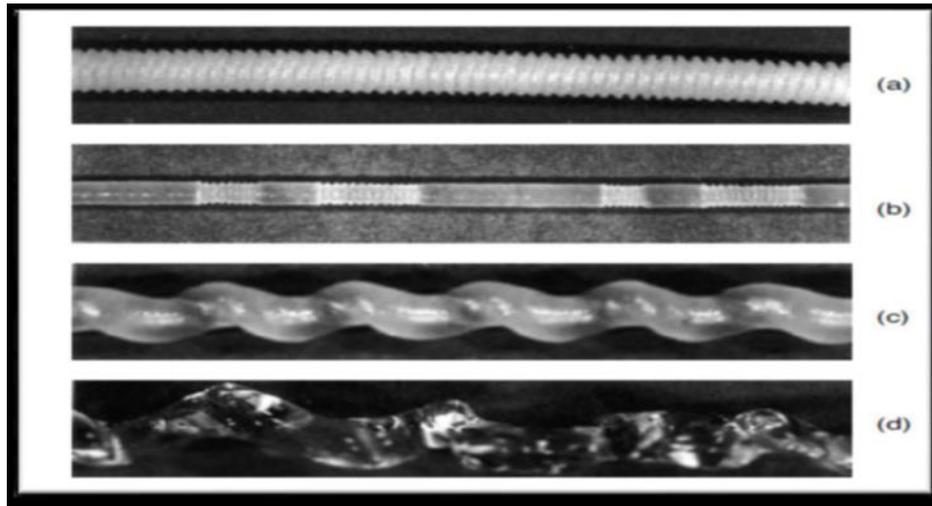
Example of extrusion defects: a) Shark skin, b) Oscillating defect, and, c, d) Volume defects [39].
